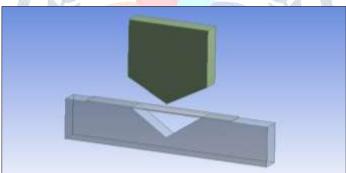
CAD modelling of punch, die and sheet metal in ANSYS design modeler
